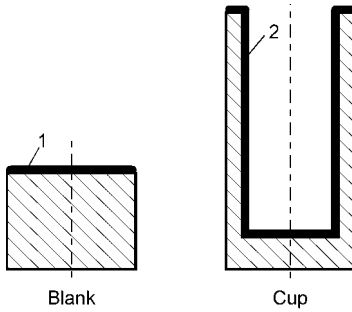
Lubricant stress through surface expansion with cup backwards extrusion. 1, coated surface before forming; 2, surface formed by a stamper after forming.
